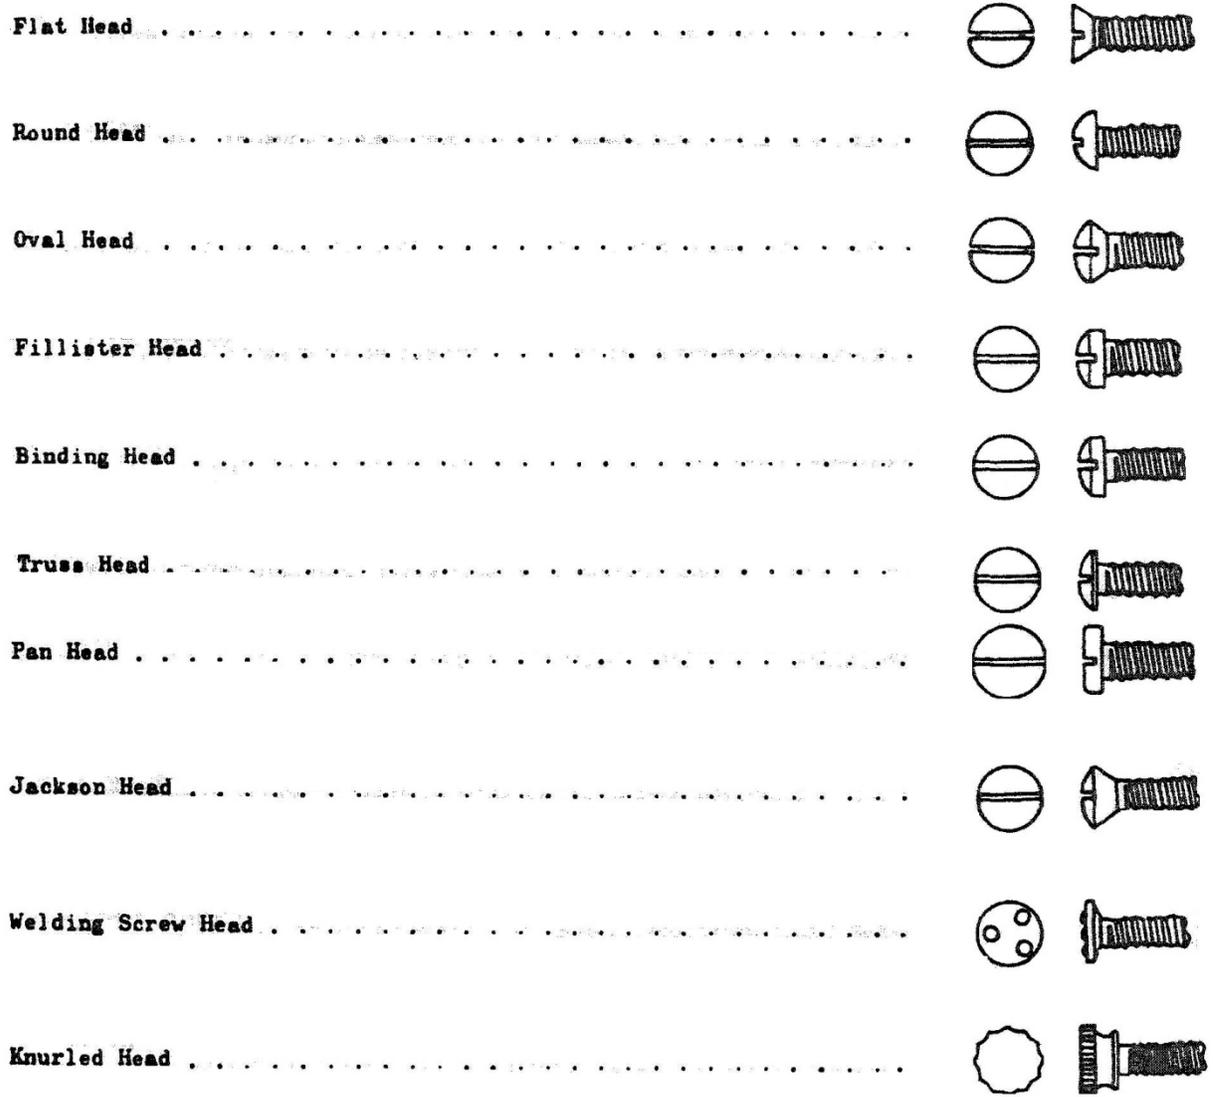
Fastener Head Styles: Screw Heads (Machine, Wood, Tapping, Stove Bolts) (Sheet 2 of 3)
